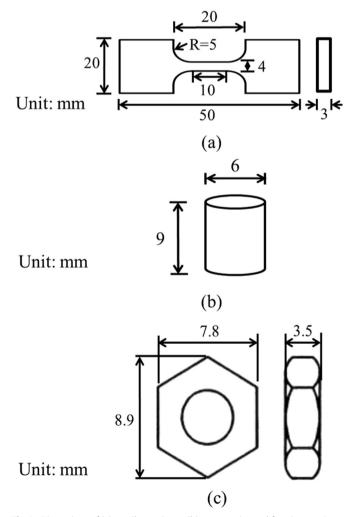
Dimensions of (a) tensile specimen, (b) compressive and forming specimen, and (c) screw nut for forming test at high temperature.
